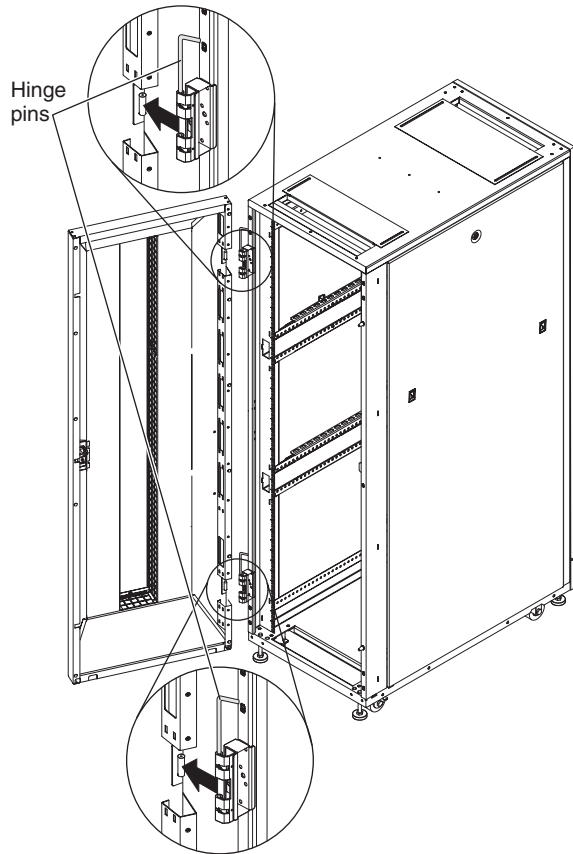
Removing the front door (9363-4AX, and 9363-4BX)
